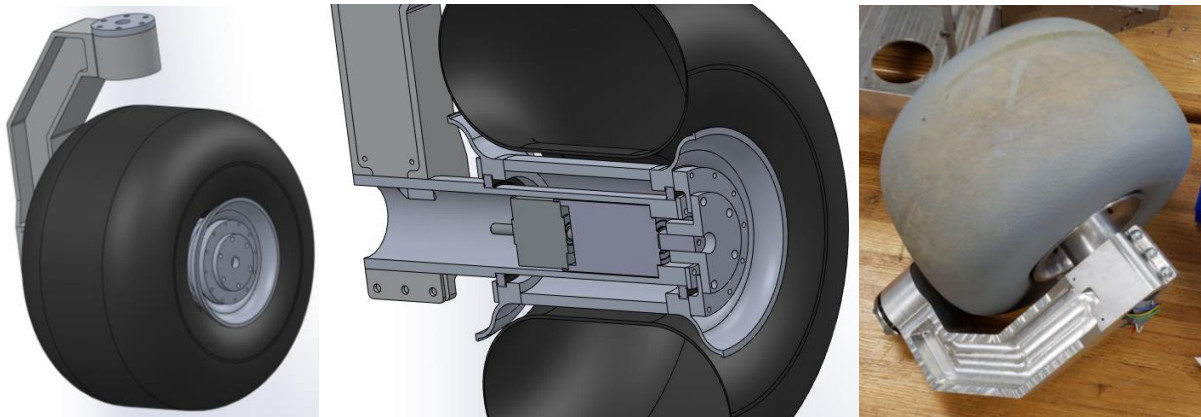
Wheel Assembly CAD (Left), Section View of CAD (Middle), and Wheel Assembly Prototype (Right) by Conner Castle
